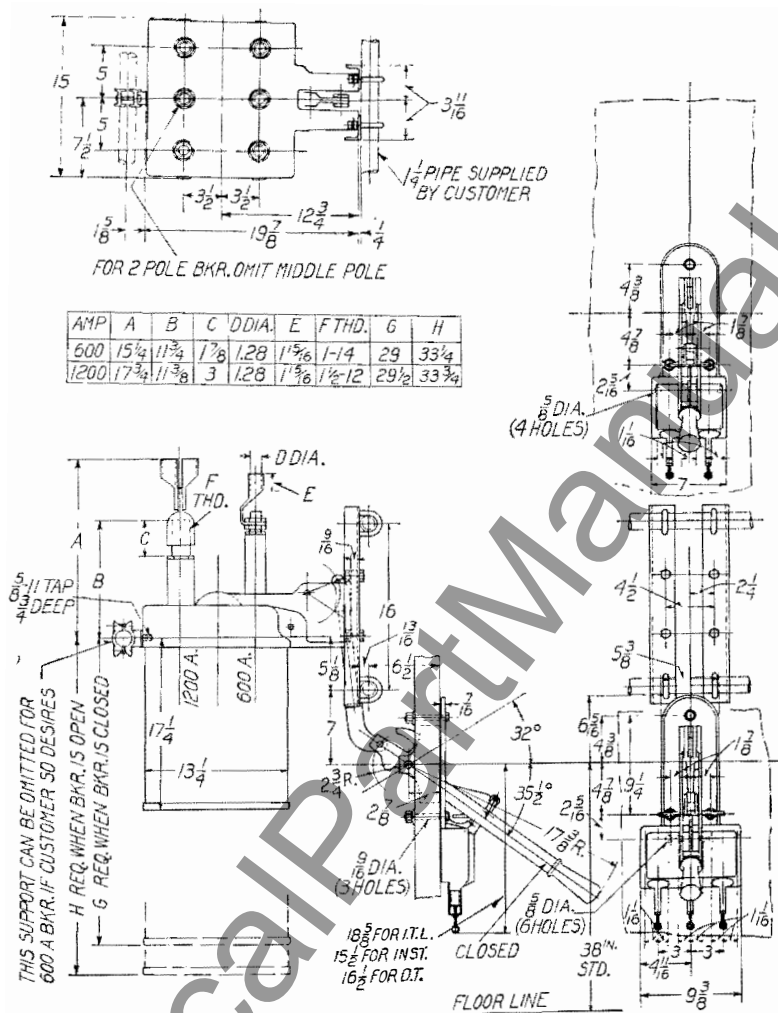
OUTLINE OF TYPE F-124, 600 AND 1200 AMPERE HAND-OPERATED OIL CIRCUIT-BREAKER, PANEL-FRAME MOUNTING
